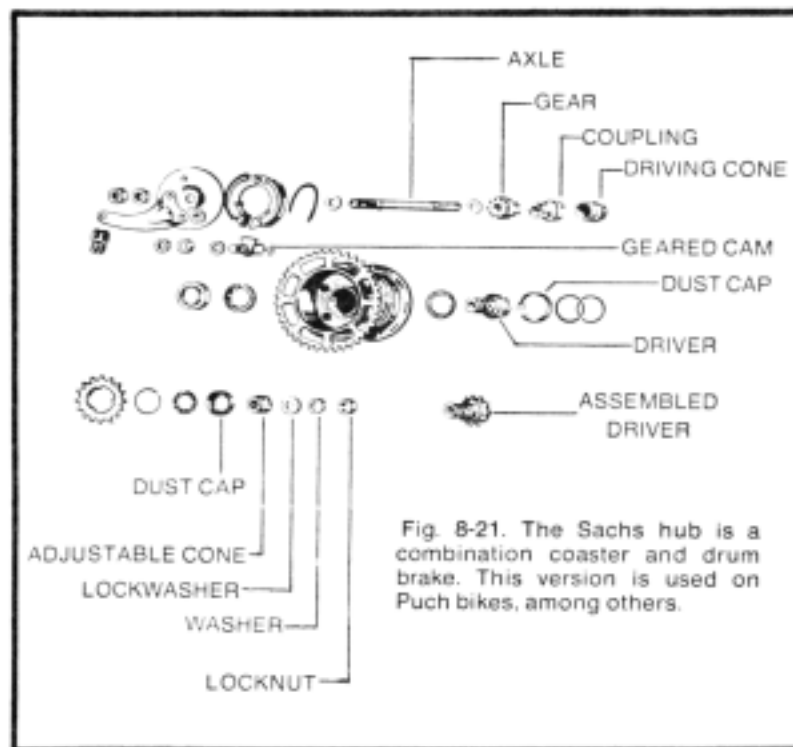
The Sachs hub is a combination coaster and drum brake. This version is used on Puch bikes, among others.
